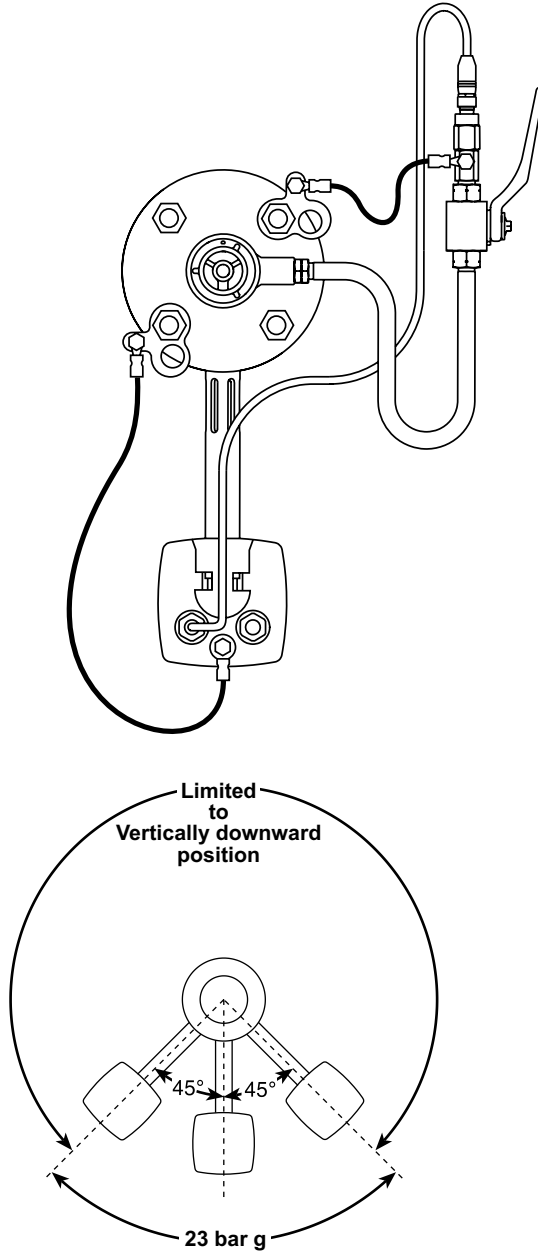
Superheated steam 23 bar g (333.5 psi g)
